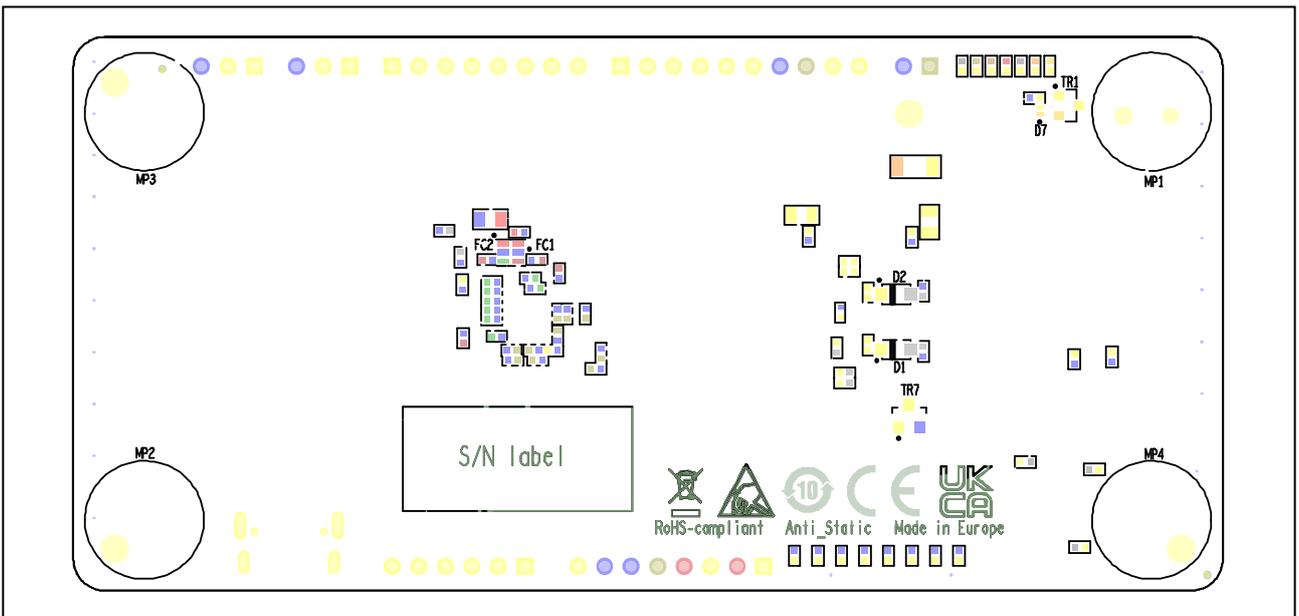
RH850/U2B10 target board with RAA271084 PMIC bottom view for board version D020090_06_V03
